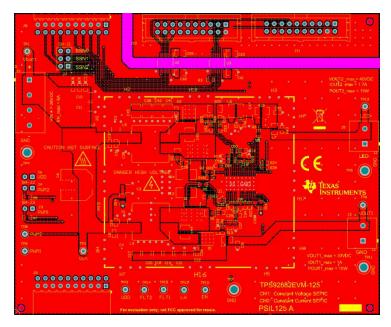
TPS92682EVM-125 Top Layer and Top Overlay (Top View)
